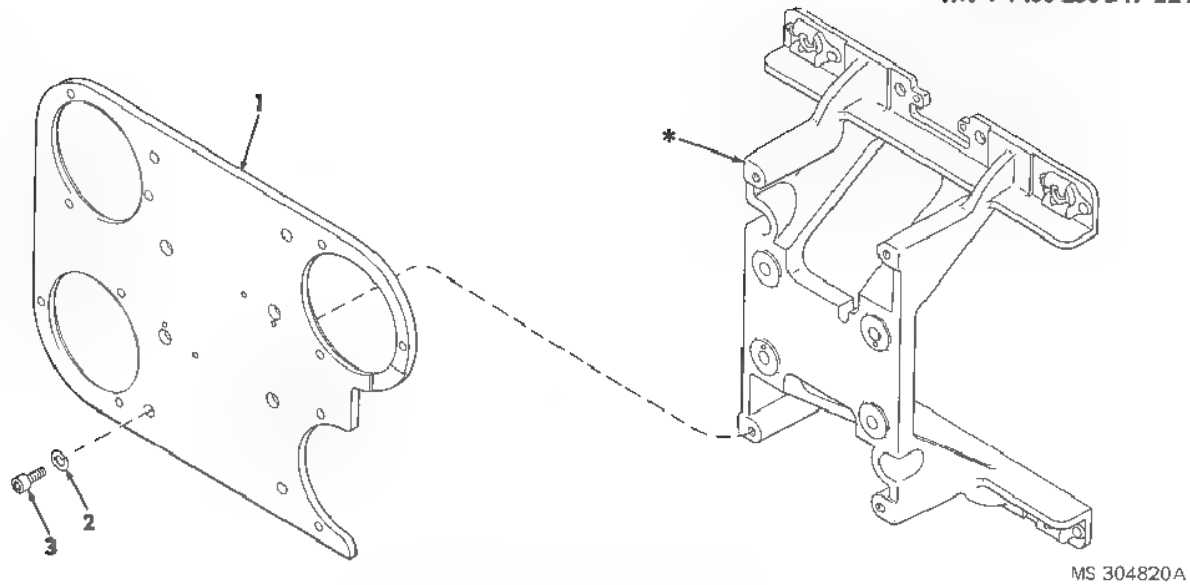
HOLDER, SEMICONDUCTOR DEVICE /9991631/-EXPLODED VIEW
